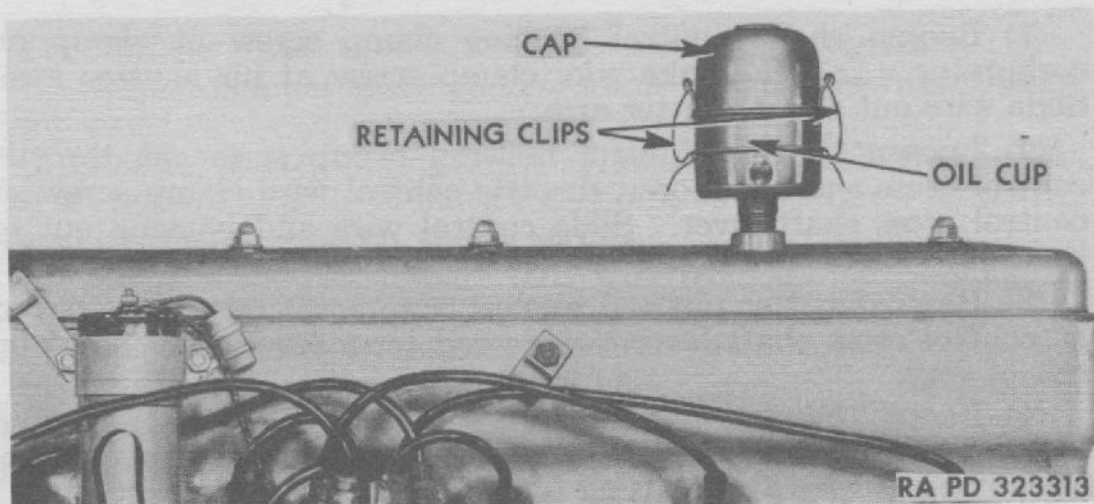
Crankcase Ventilator Metering Valve Installed
